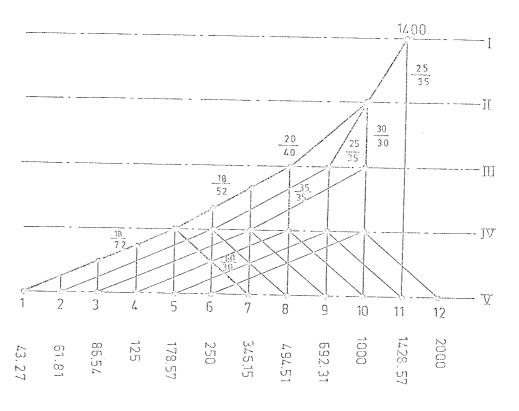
Speed Chart of the Gearbox used for Main Drive of TOS Milling Machine
